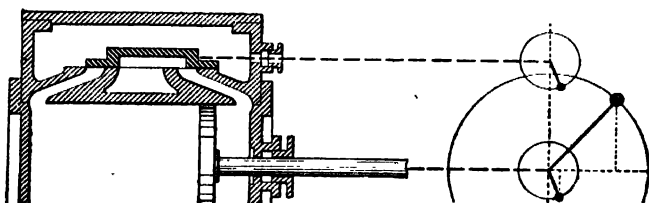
Left-hand port just closed to steam ; expansion commencing.
